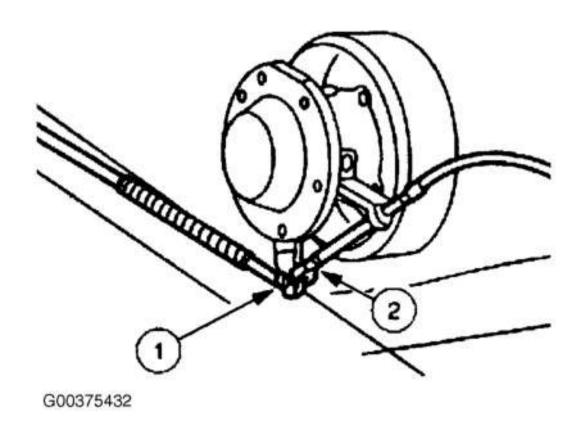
Locating Lever Return Spring Courtesy of FORD MOTOR CO.
